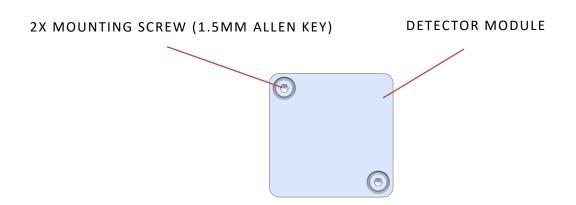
CUBE527E DETECTOR MODULE (FRONT VIEW)
